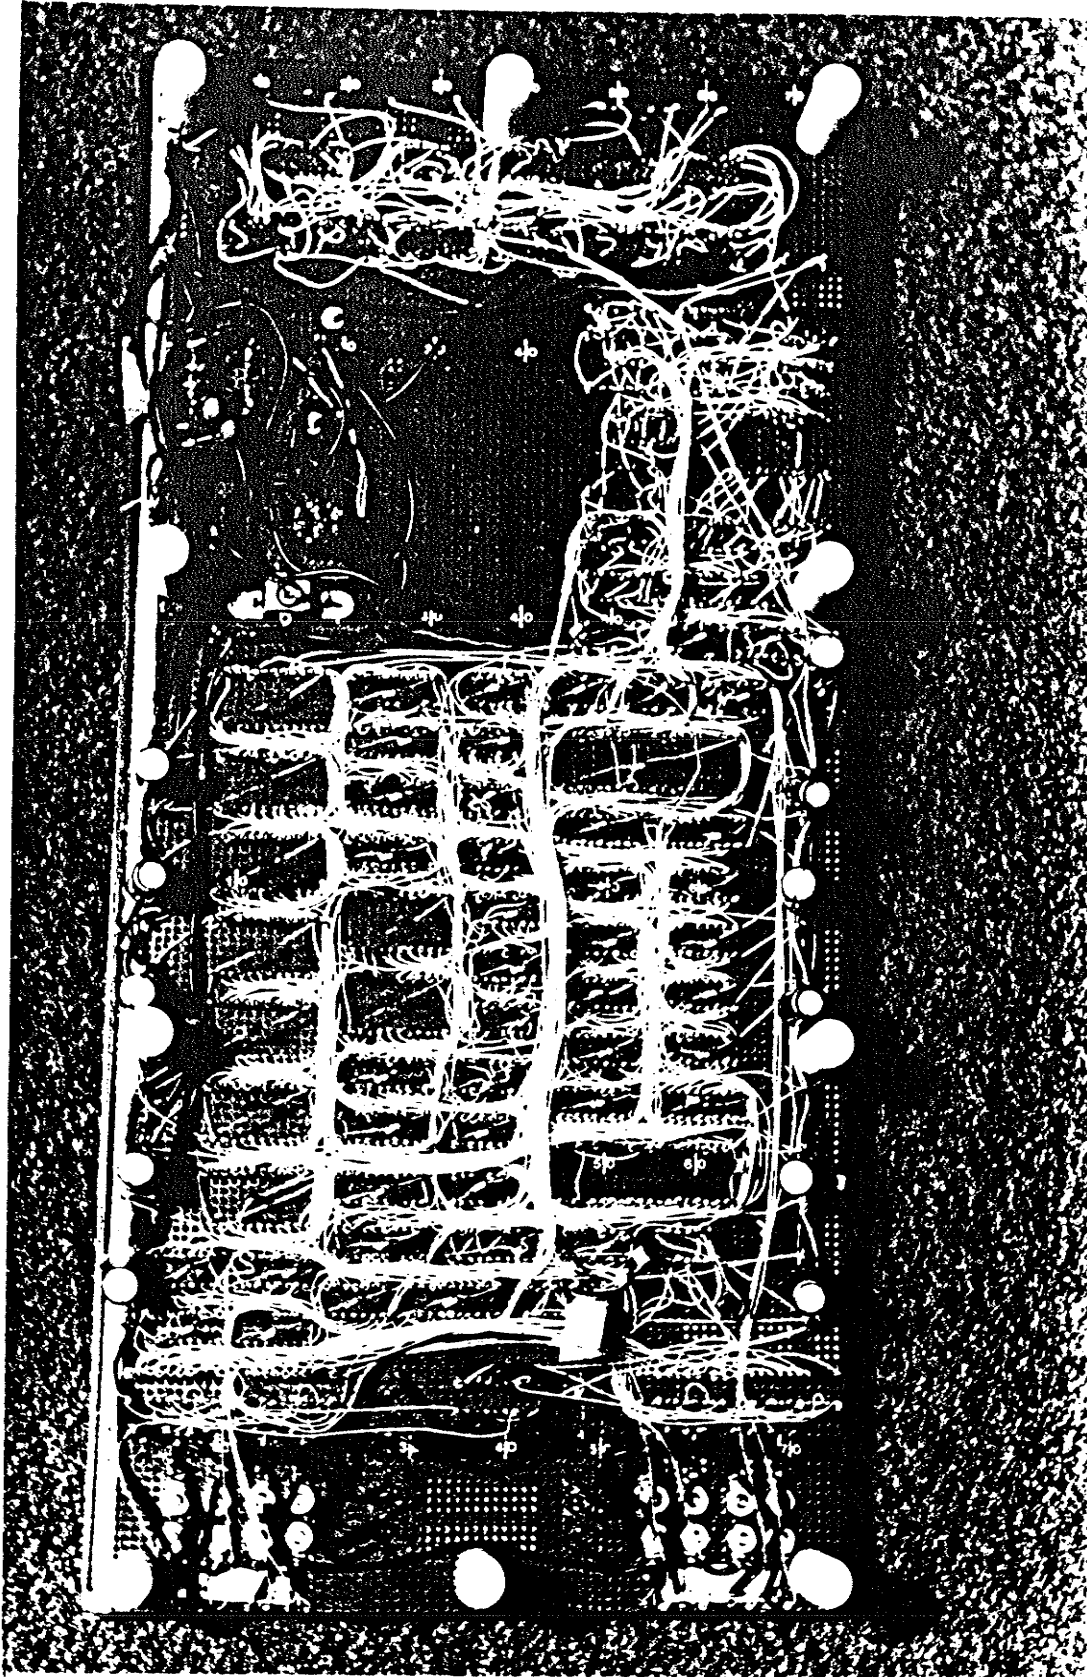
Bottom Side of Wire Wropped Prototype 1.
